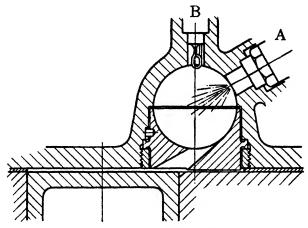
THE COMET HEAD A. Injector. B. Heater Plug.
